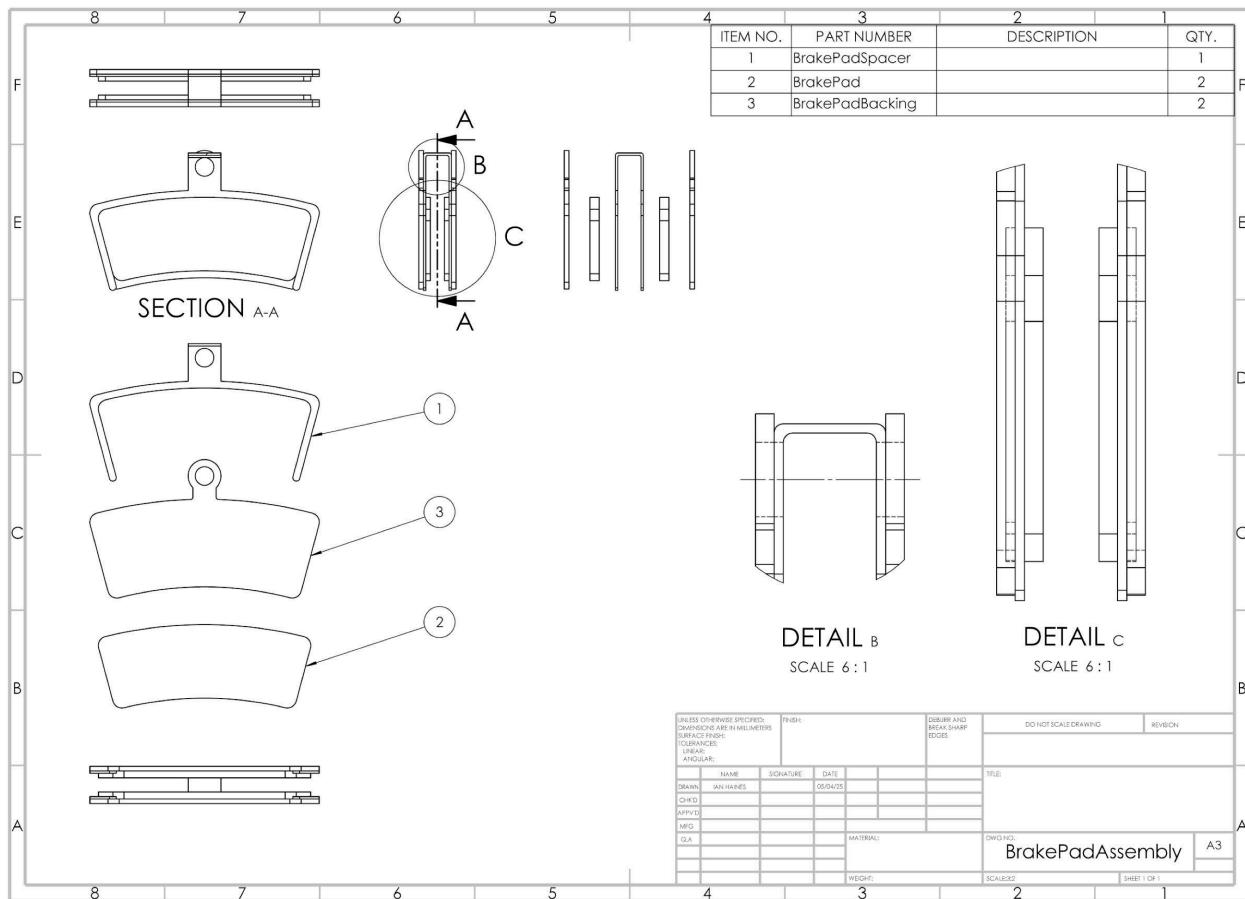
Exploded view of the brake pad assembly.
